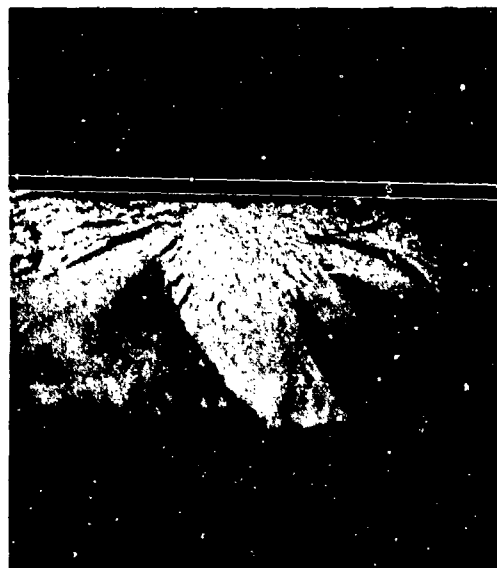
Typical fracture surface for crack in an annealed sample.
